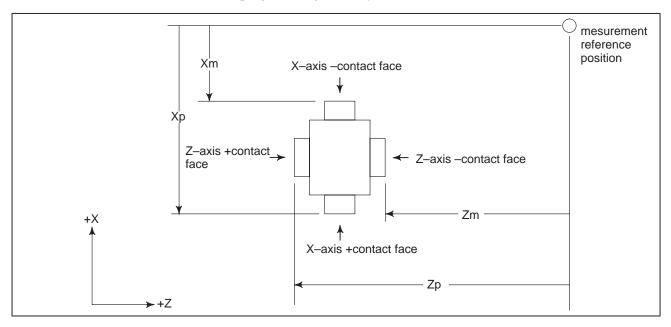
Distance along X and Z Axes from the Reference Position to +/– Contact Surfaces
